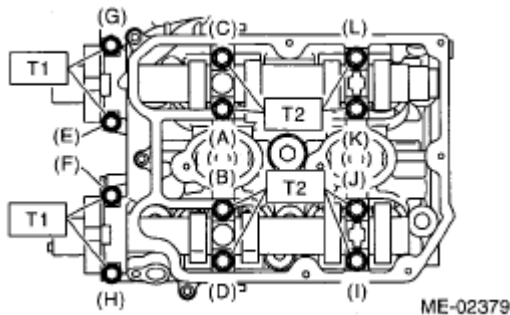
Identifying Camshaft Cap And Oil Control Valve Assembly Alphabetical Sequence
